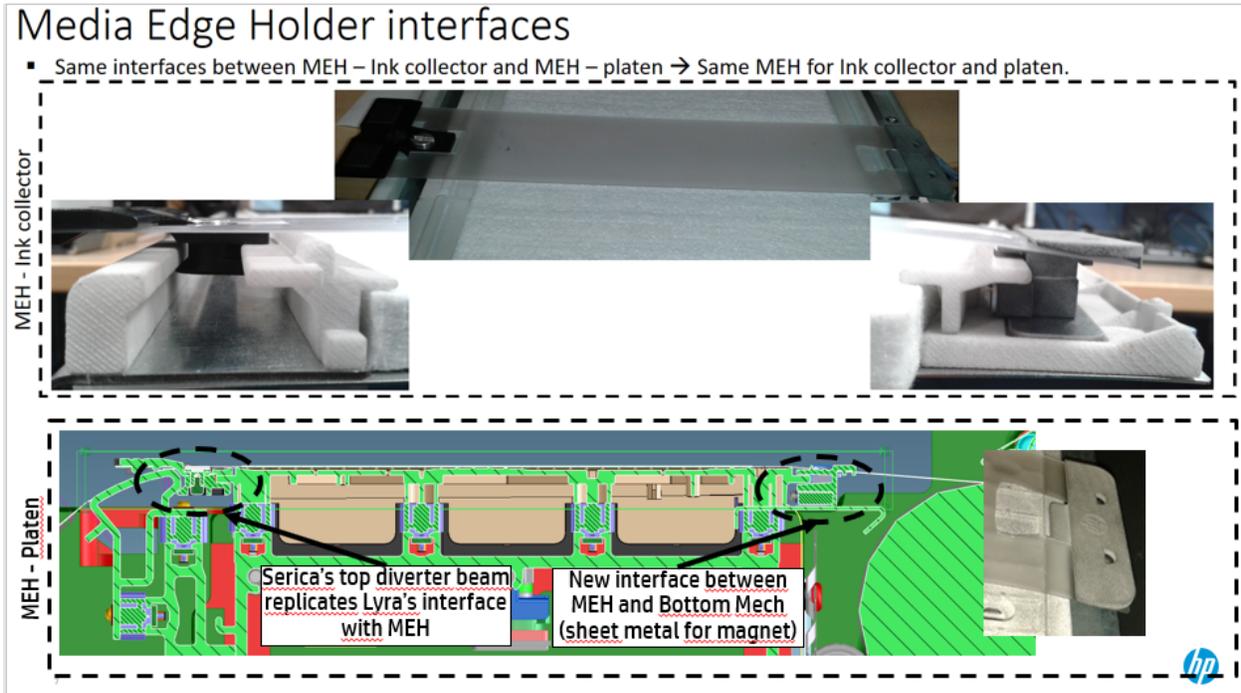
Interfaces between edge holder - ink collector, and edge holder - platen.
